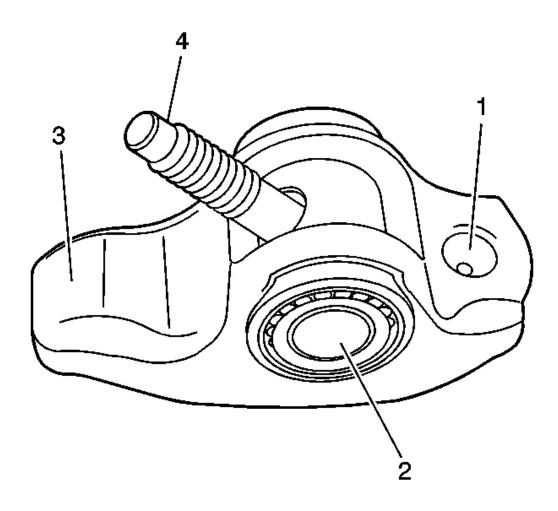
Pushrod Socket, Roller Pivot & Valve Stem Tip Courtesy of GENERAL MOTORS CORP.
